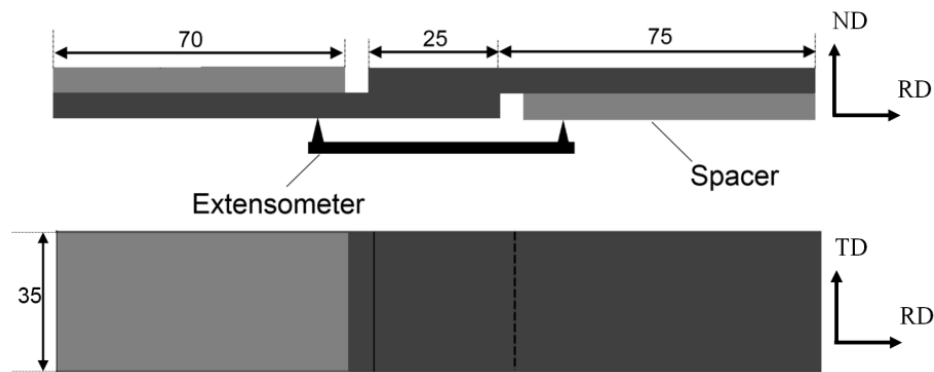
Schematic drawing of welding assembly and accommodation of extensometer
